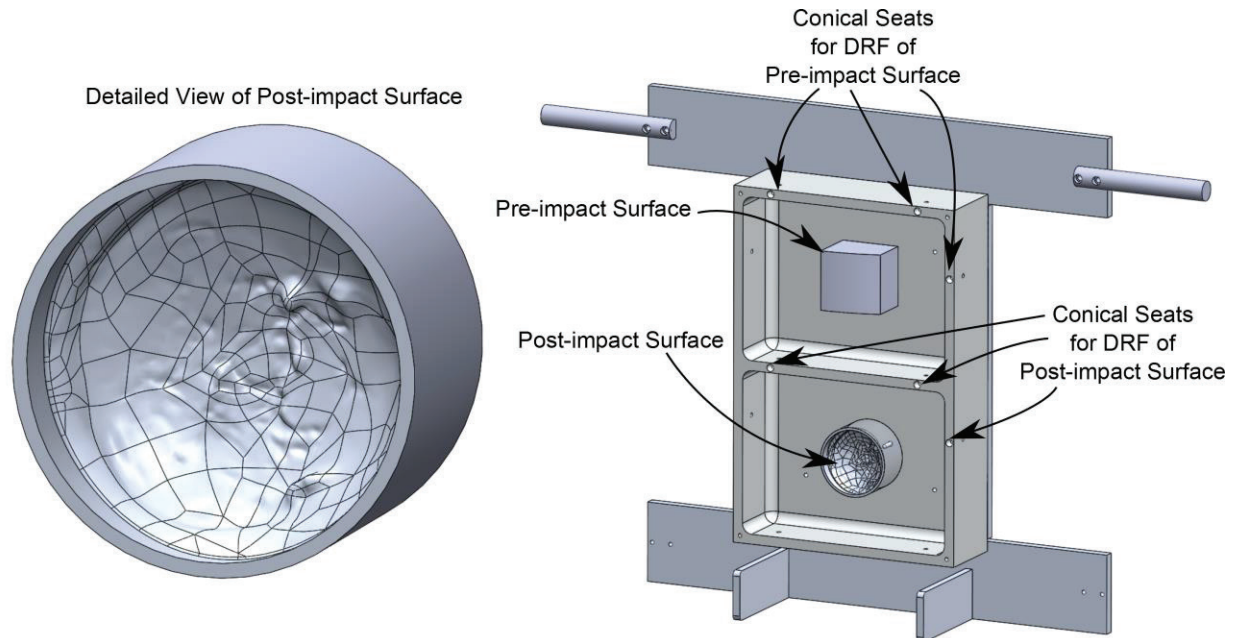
(Left) Detailed view of Post-impact surface for Dual Chamber design, (Right) Assembly of pre and post-impact surfaces in dual chamber fixture with respect to DRFs
